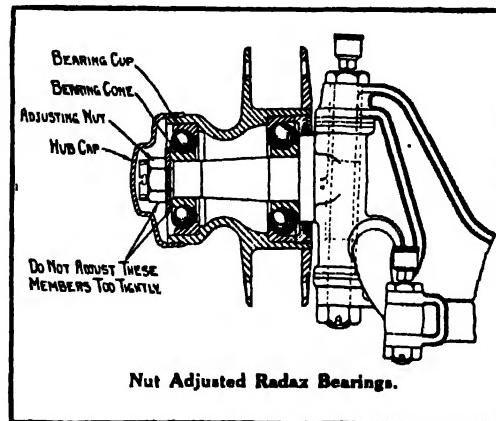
Front Hub Showing Nut Adjusted Cup and Cone Type Ball Bearing.
